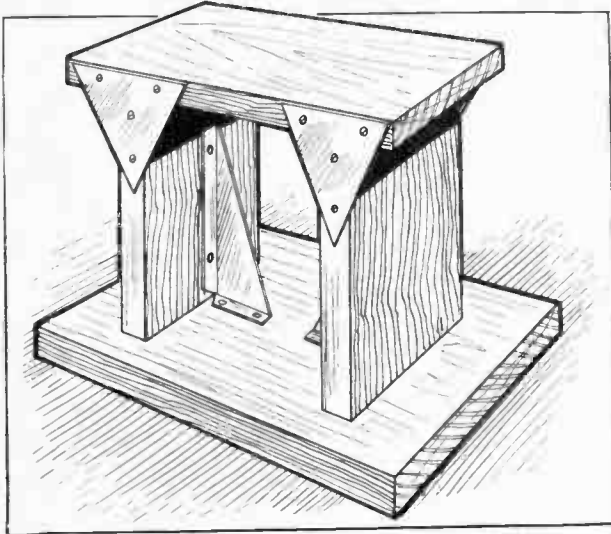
A simple home constructed support for holding a motor driving the vision apparatus disc.
